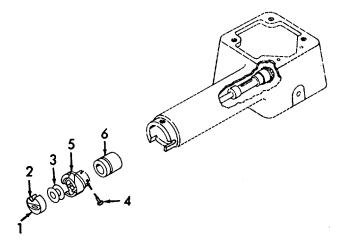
Bobbin and Rotary Sewing Hook Assemblies, Removal.
